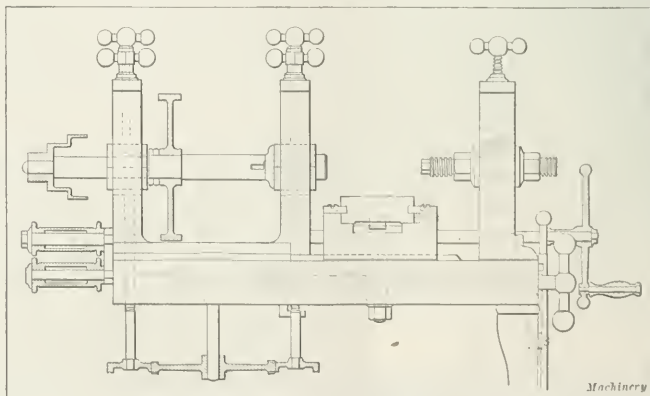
Robbins & Lawrence Milling Machine reproduced from Drawing made by F. W. Howe about 1853
